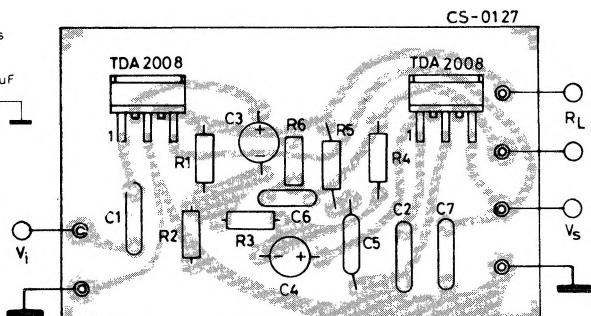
P.C. board and component layout for the circuit of fig. 3 (1:1 scale)
